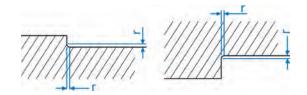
DIMENSION OF CONTACT DATUM PLANE
